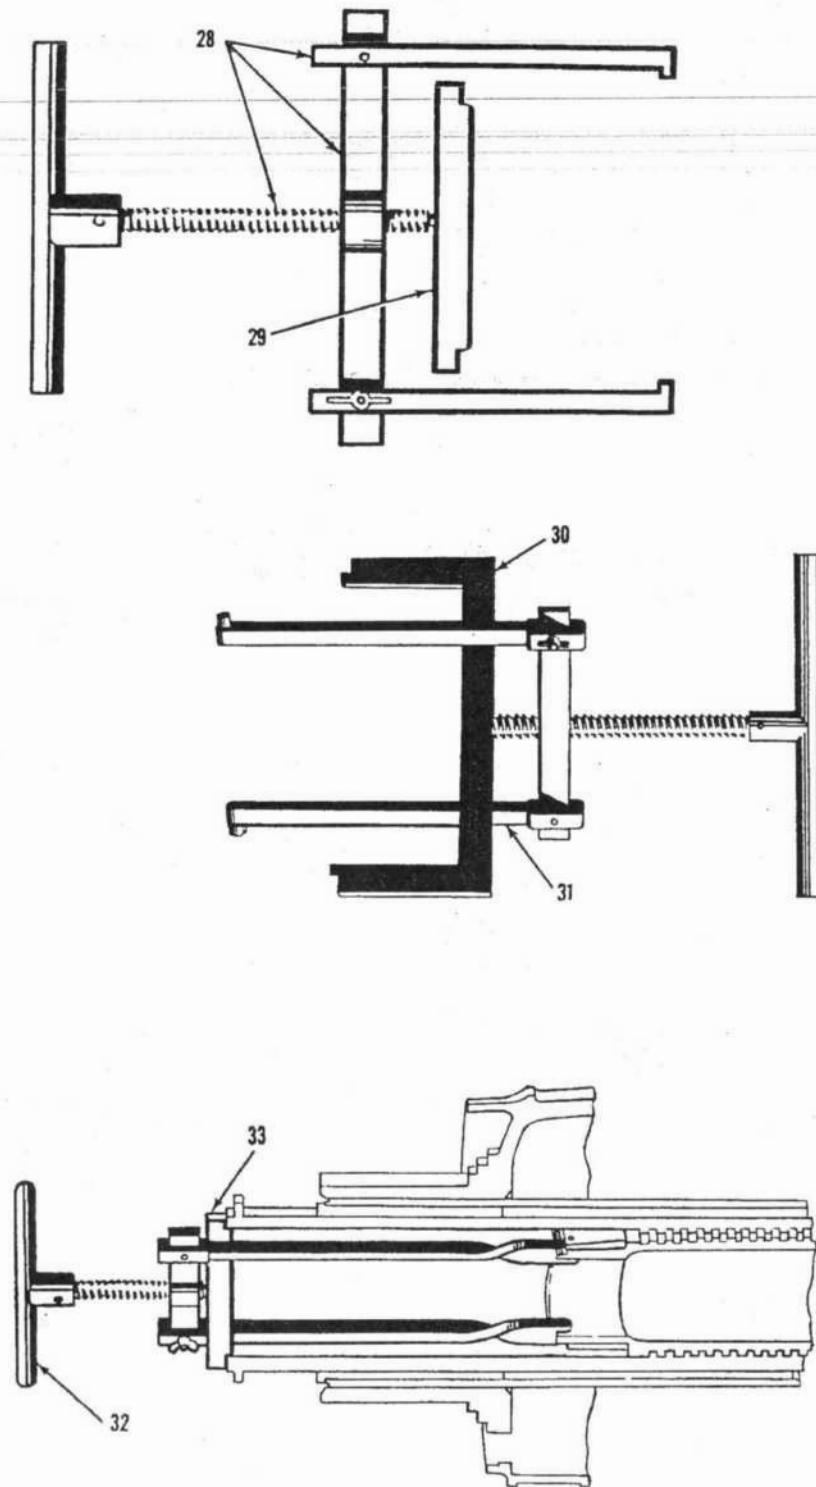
20 MM A.A. Guns and Mounts Special Tools
